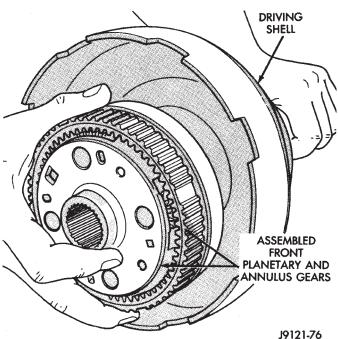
Installing Front Planetary And Annulus Gear Assembly—46RH
